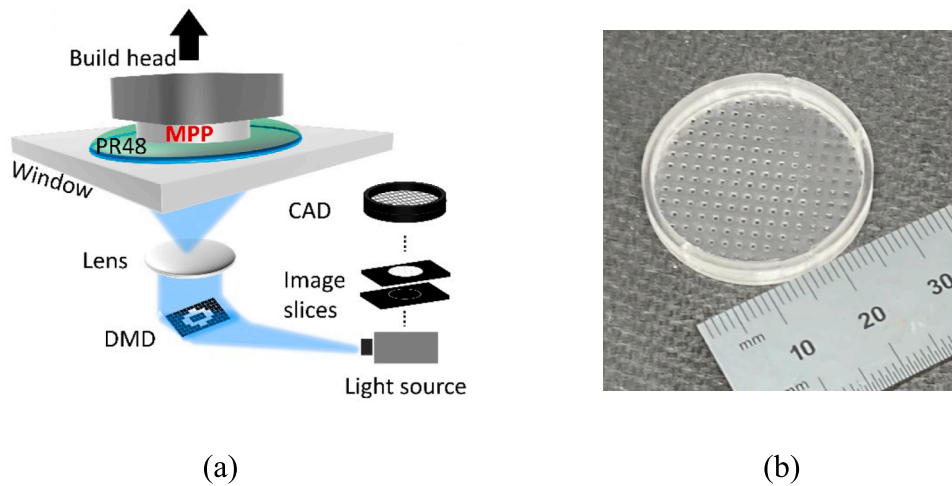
(a) Fabrication of the MPP samples using DLP 3D printing (3DP) technology, (b) detailed view of a printed MPP obtained from the MPP design image.
